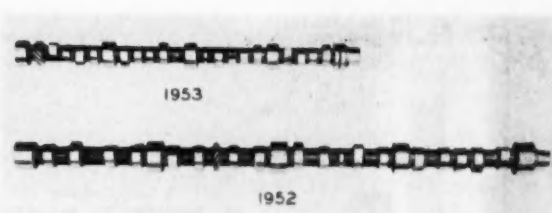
The five-bearing camshaft is much smaller and lighter than the camshaft in the 1952 Buick in-line eight
